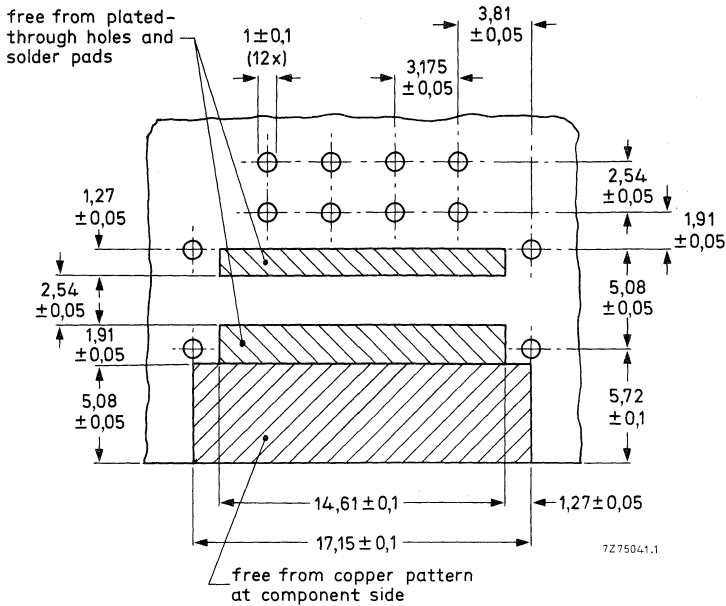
Hole pattern for the spring contact box with 8 pins.
